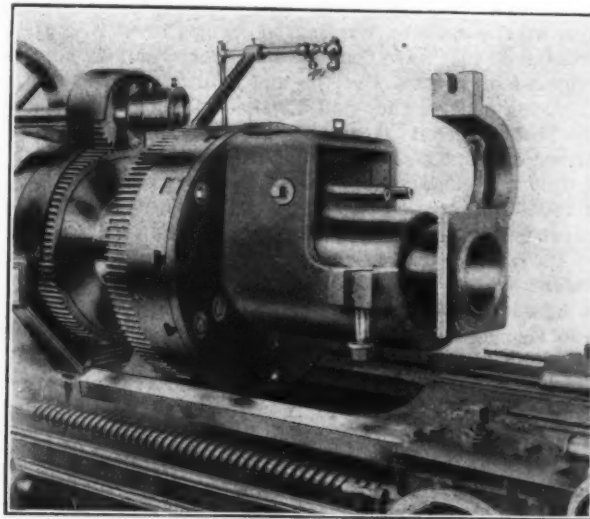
A Special Bonnet for Chucking a Different Type of Cylinder.
